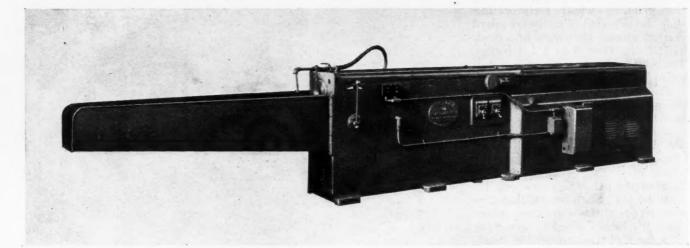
Heavy-duty Broaching Machine Brought out by American Broach & Machine Co.
